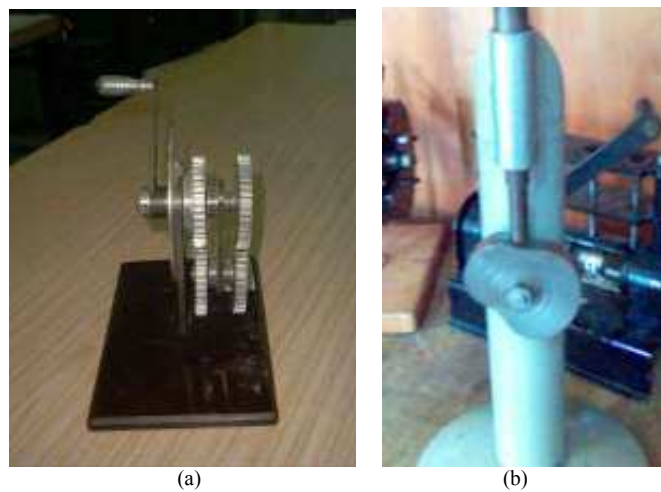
(a) planetary mechanism; (b) rotating cam mechanism and translatable stick
